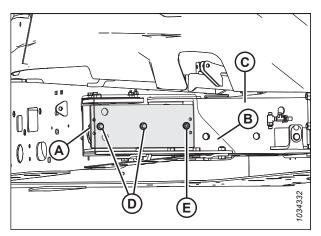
Rear Wearplate in Walking Beam — Left Side Shown
